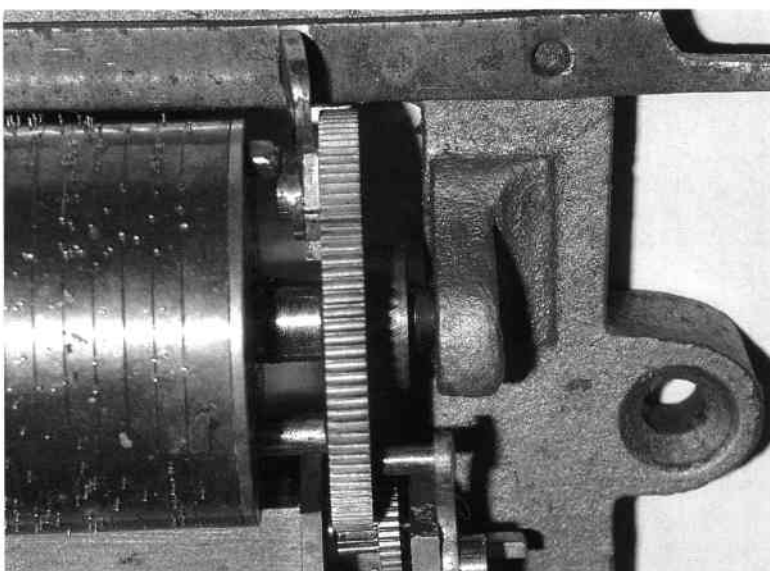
Steel female bearing screwed into treble end bedplate bracket.
